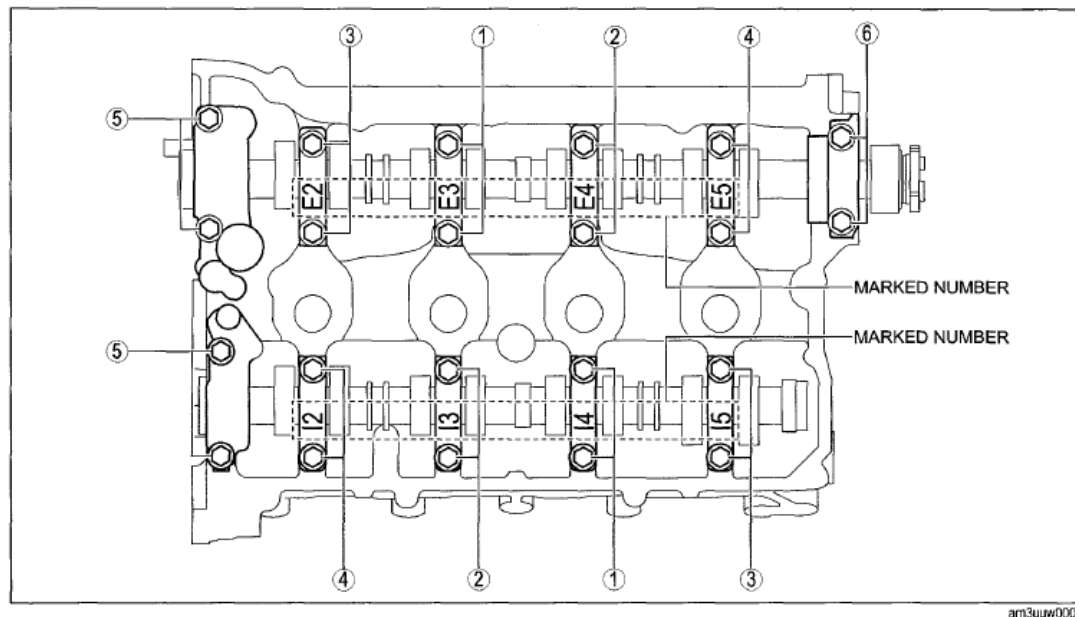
Locating Camshaft Bearing Thrust Caps And Bolts
